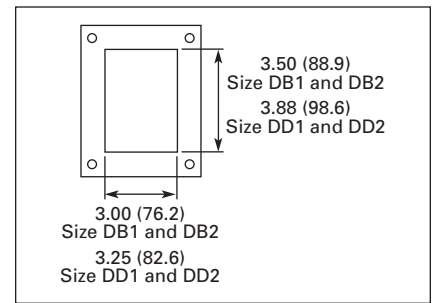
Approximate Dimensions Panel Cutout Cavity Mount
